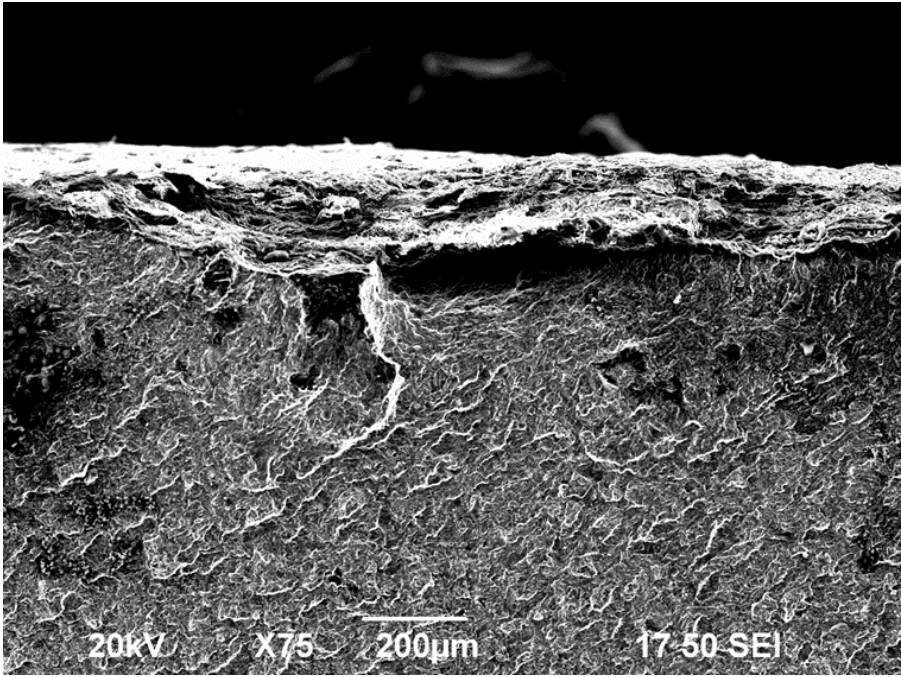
S355 corroded Fatigue crack initiation (FACE)
